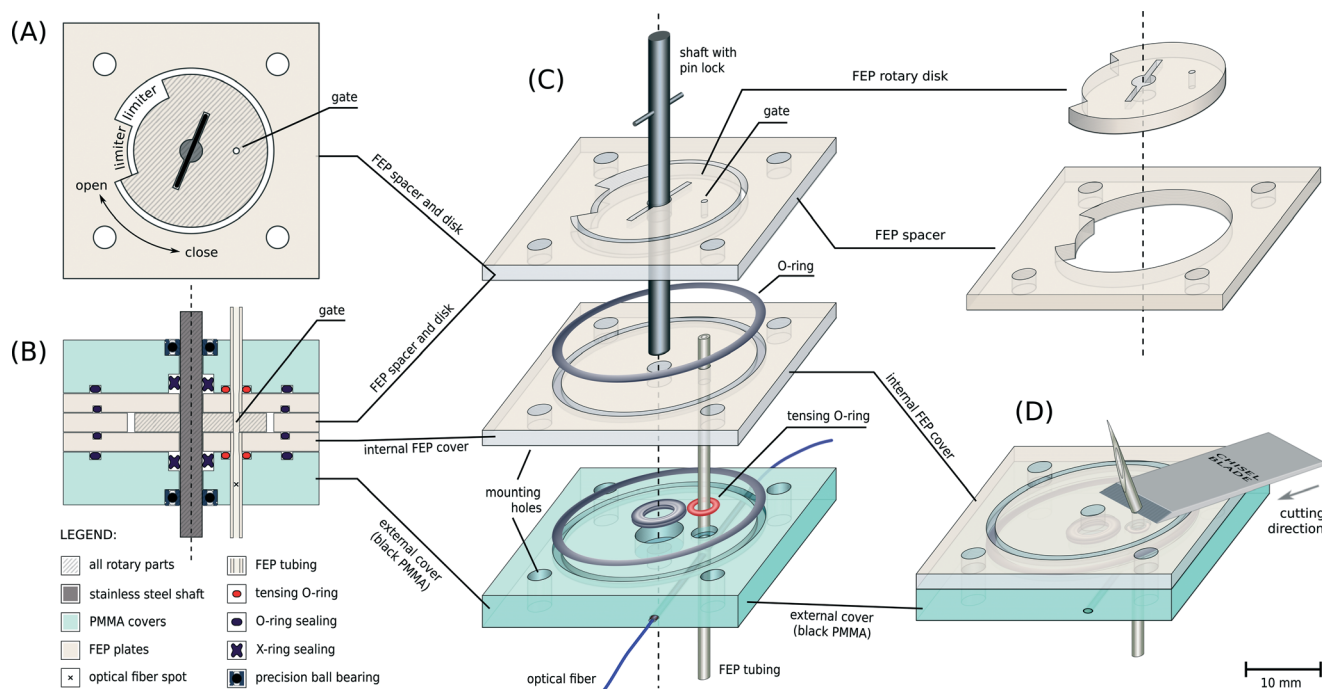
shows the schematic of the valve. The core elements of the valve (the rotary disk between two covers, see Fig. 1C) are made of FEP Teflon. These parts are embedded in a chassis composed of a number of supporting parts that provide mechanical stability and isolate the fluidic path through the valve from the external environment. The whole valve comprises a stack of five layers: the central layer (shown in Fig. 2A, in the middle of the cross-sectional view in Fig. 2B, and at the top of Fig. 2C), internal covers (two identical copies) and external covers (two almost identical). All the layers are pressed together with mounting screws and sealed with rubber O-rings. Importantly, the O-rings also serve to balance the mechanical stresses – see sec. 2.4. Fig. 2C shows an exploded view of the bottom three layers of the valve together with all the O-rings and the FEP tubing.
